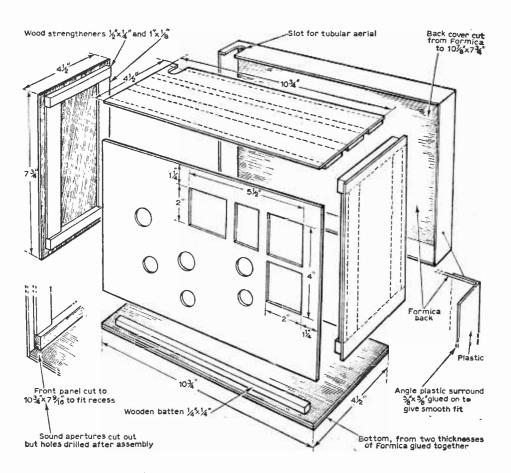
An exploded view of the Chelmer 4 cabinet, giving dimensions.
